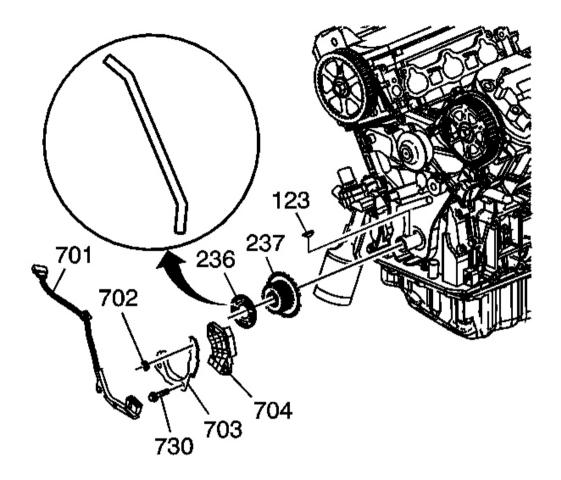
View Of Crankshaft (CKP) Sensor & Harness Courtesy of GENERAL MOTORS CORP.
